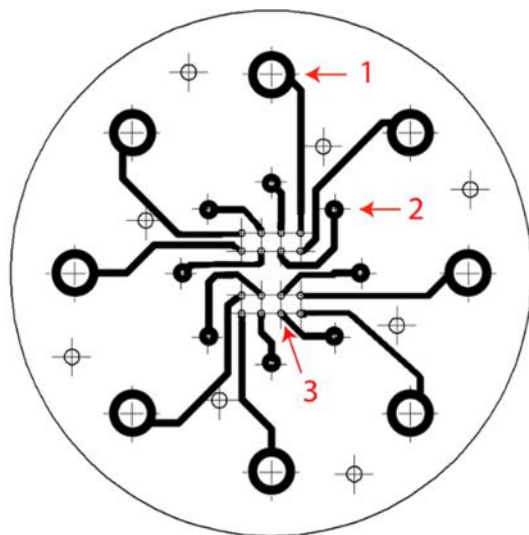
Detailed view of the PCB – printed circuit board: 1: conducting pads for the helical spring (Figure 2.1, item 3); 2: conducting pads for wire from metallic cap (Figure 2.1, item 1 and 5); 3: conducting pads for the MOLEX - connector (Figure 2.1, item 8).
